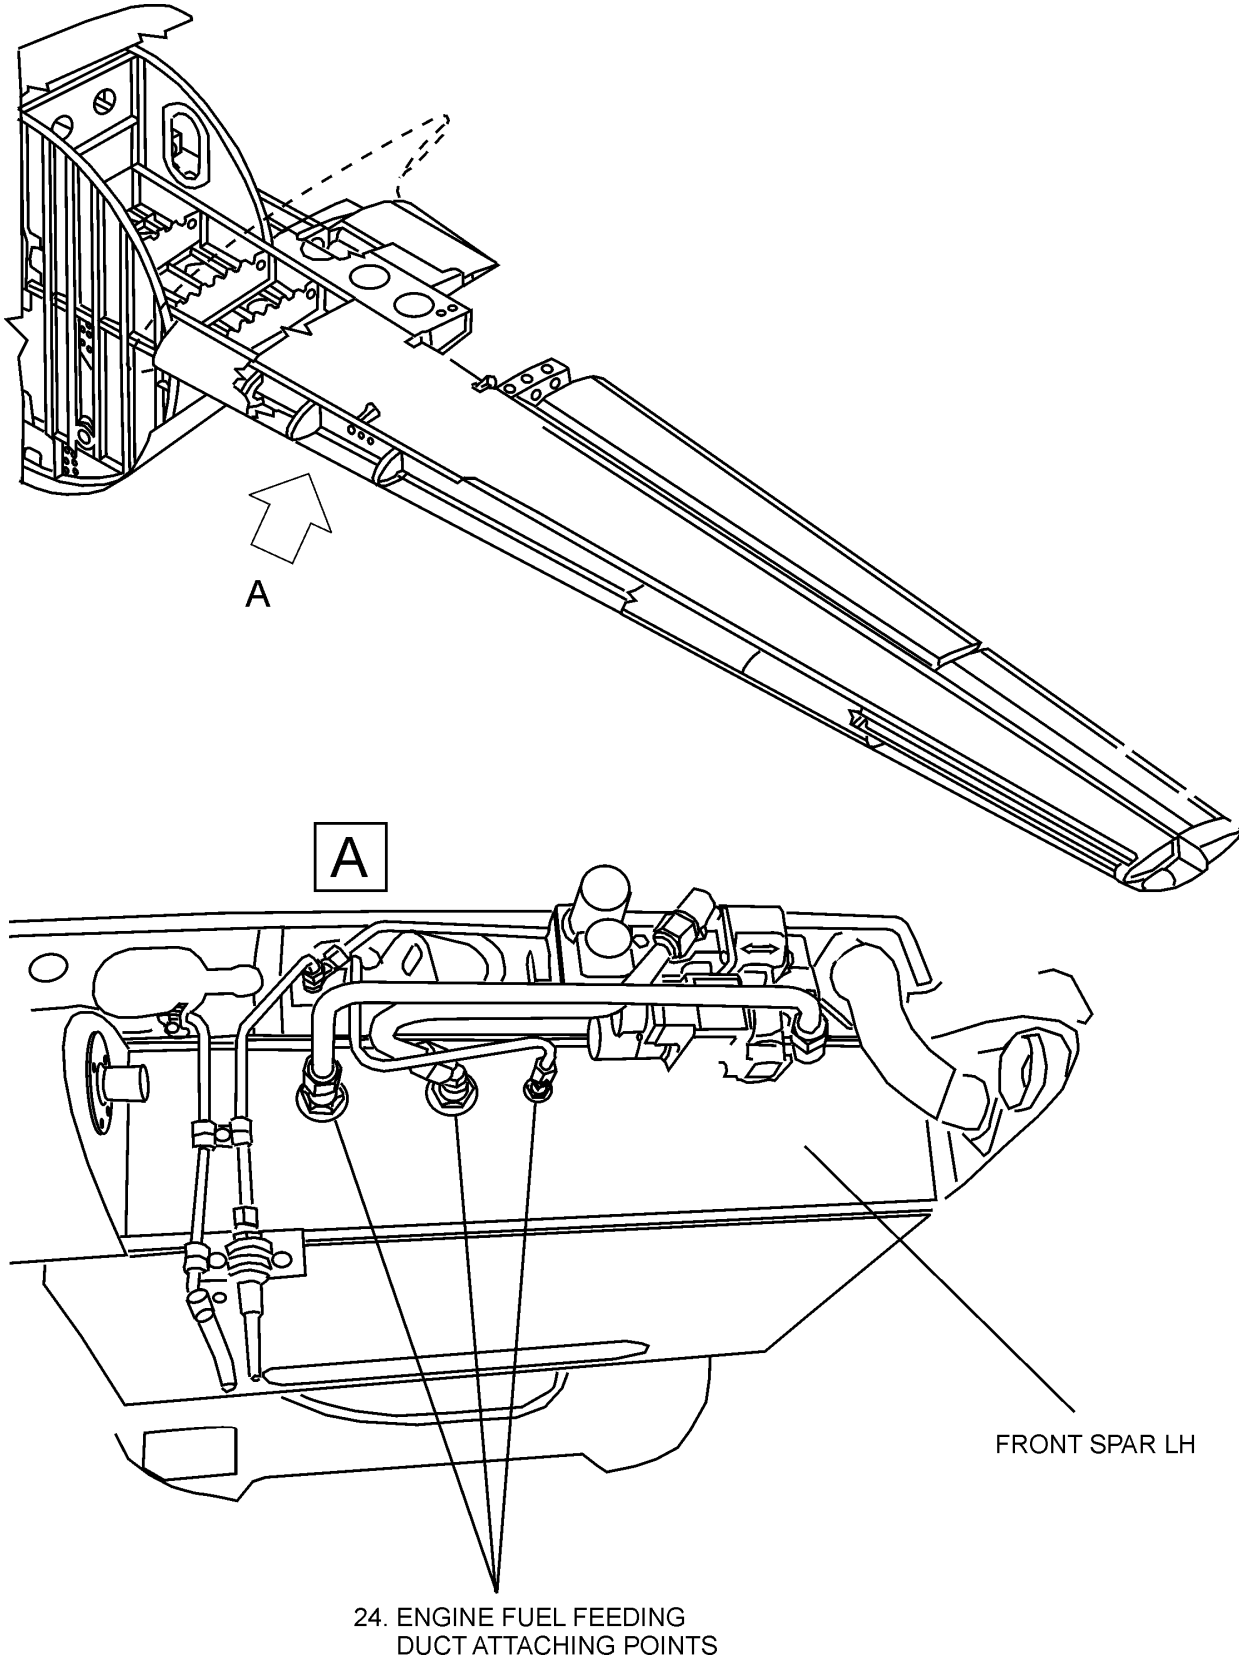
Fuel Tanks Access Panels and Components - Leakage Check (Sheet 6 of 6)
